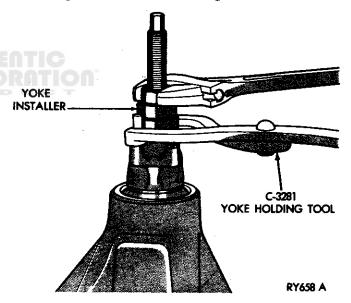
Drive Pinion Gear Shaft (Axle) Yoke Installation
